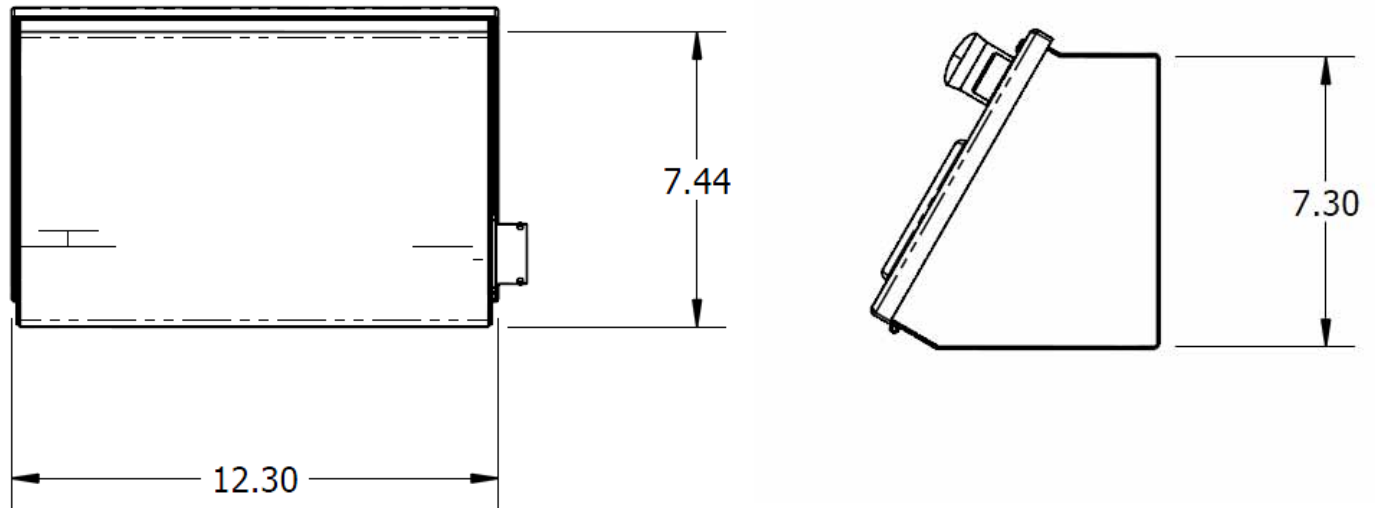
User Interface Panel overall dimensions (Bottom & Side View)
